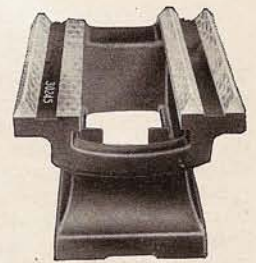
End View of Lathe Bed Showing Serial No. of Lathe
